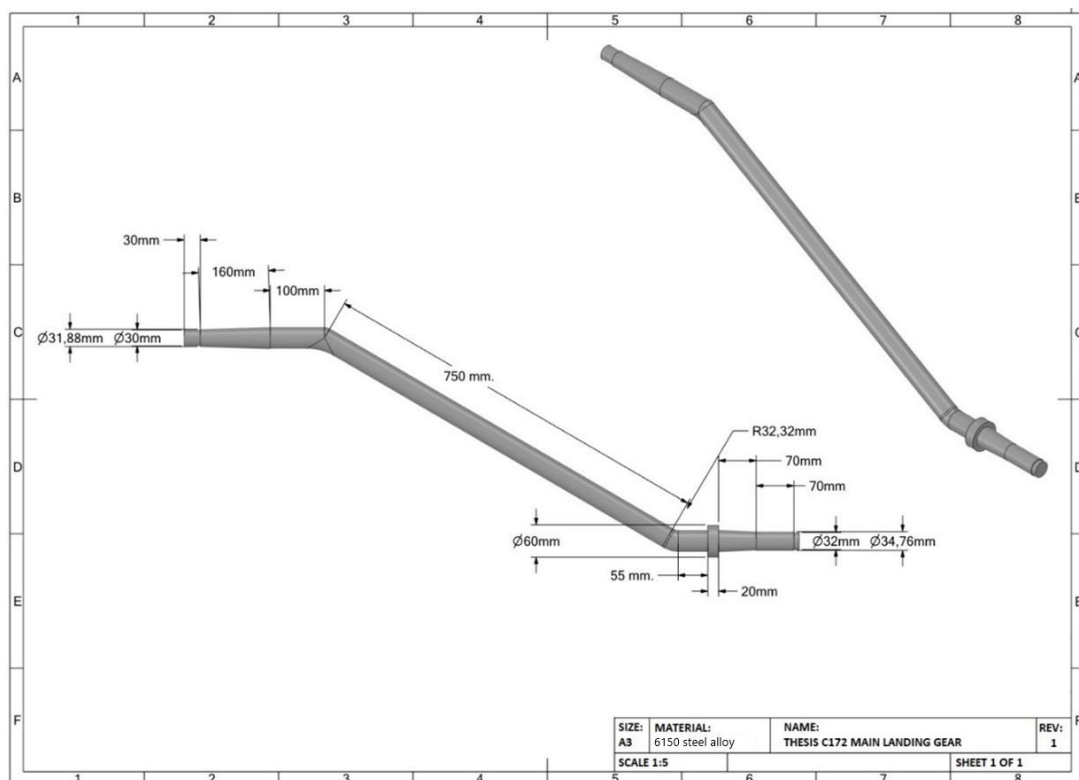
Cessna 172R main landing gear strut CAD model and geometry dimensions.
